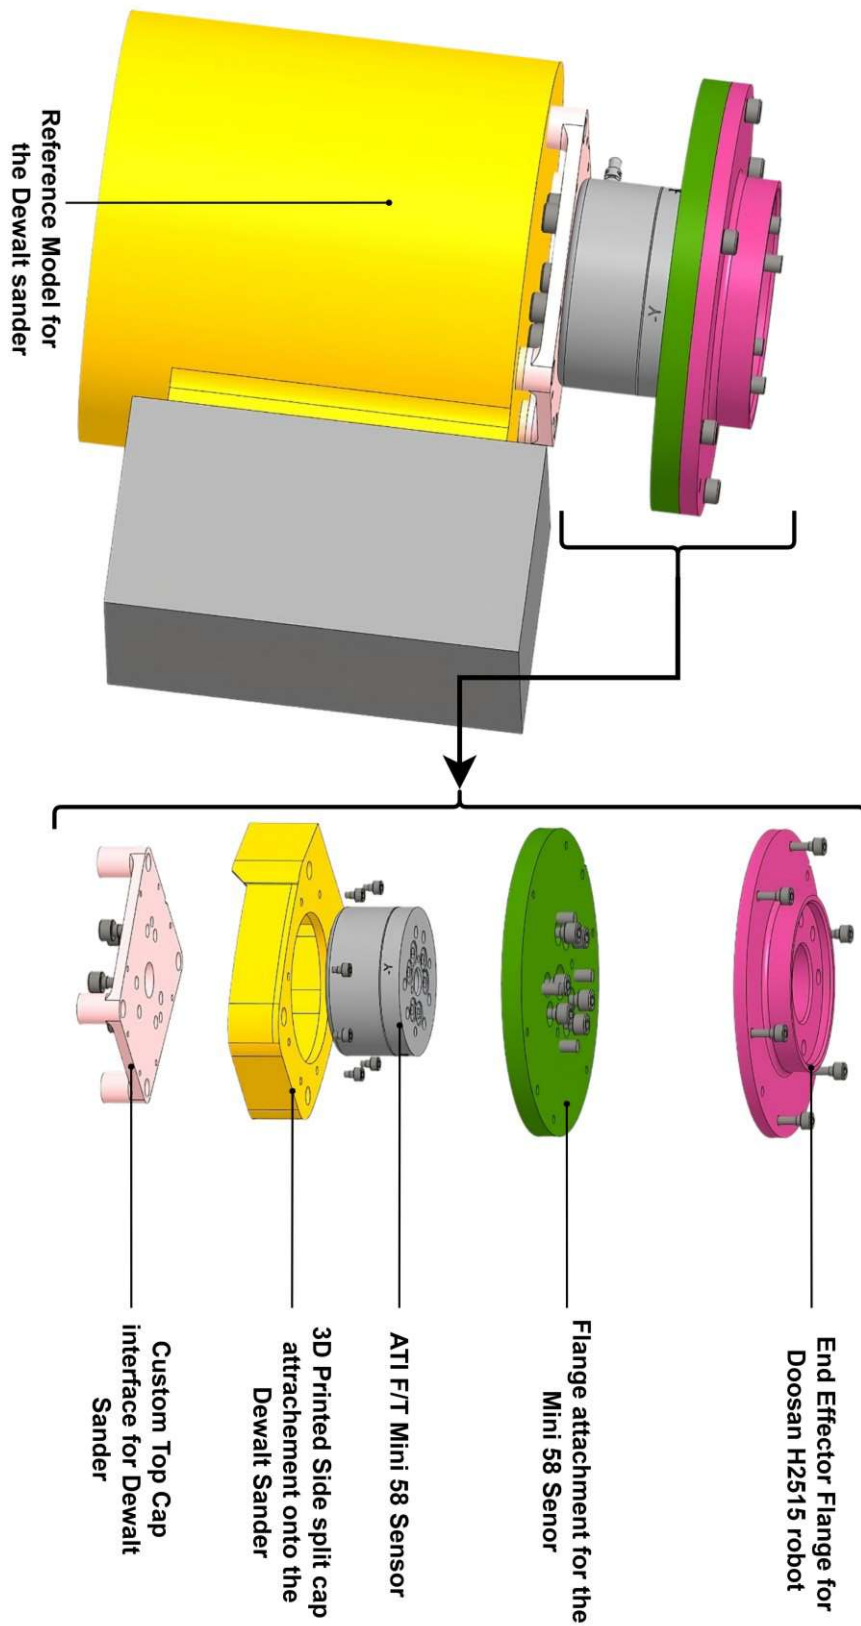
Model of the assembled end-effector tool interface with the corresponding exploded view of the attachment interface.
